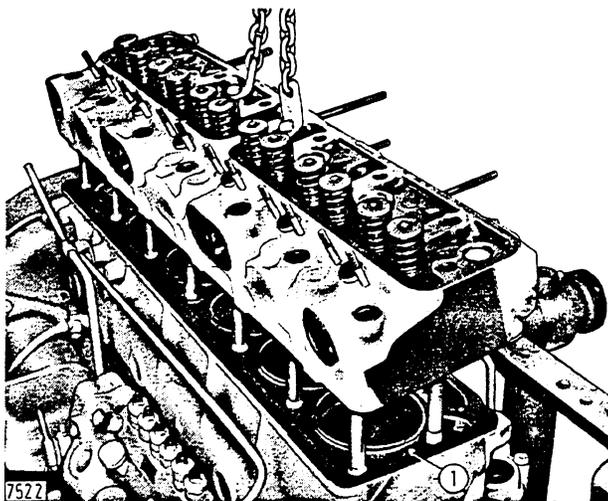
Removing (installing) cylinder head on roll-over type stand.
